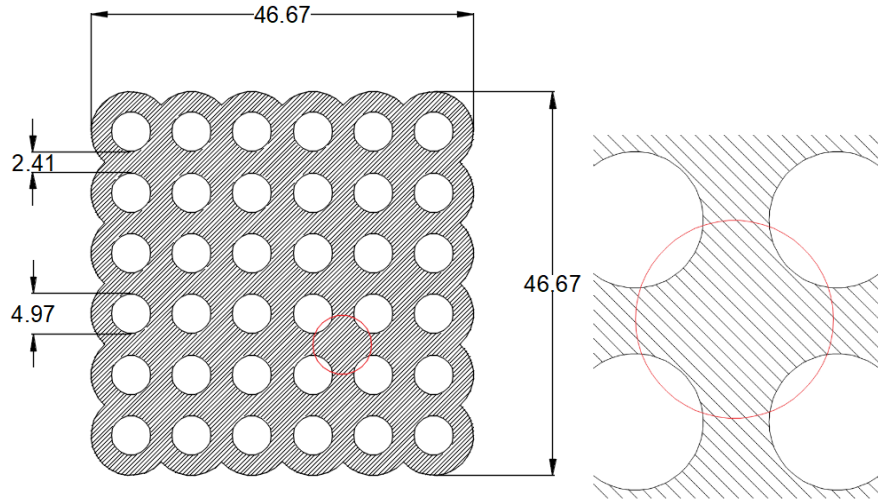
Horn cross-section with dimensions in mm and connectivity.
